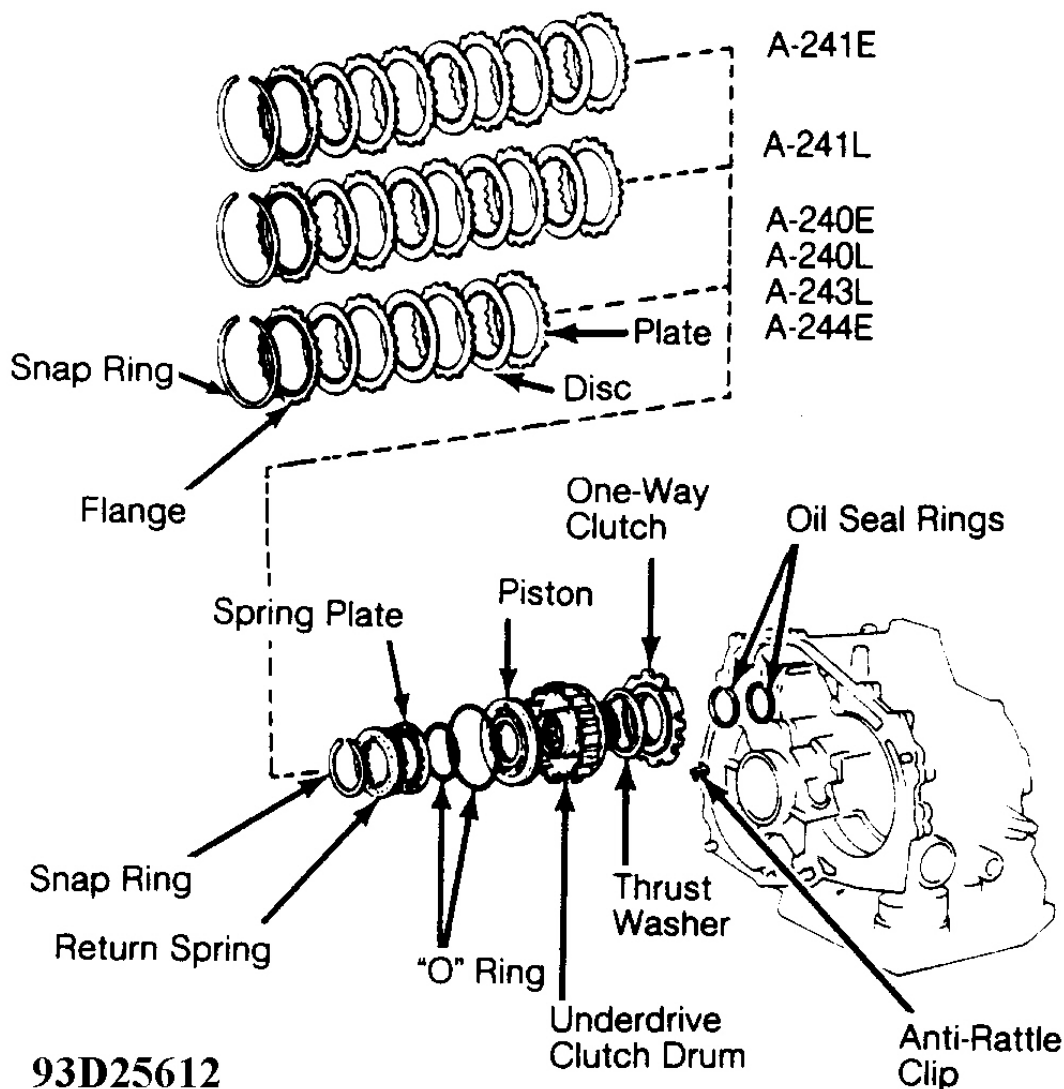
Exploded View Of Underdrive Clutch & No. 3 One-Way Clutch
